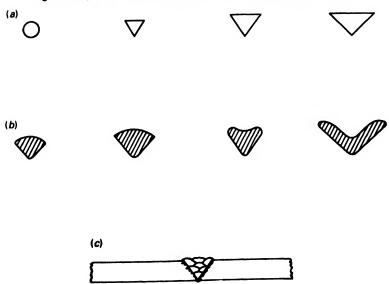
(a) Sections of welding rod. (b) Profiled welding rods. (c) Multi-run.
